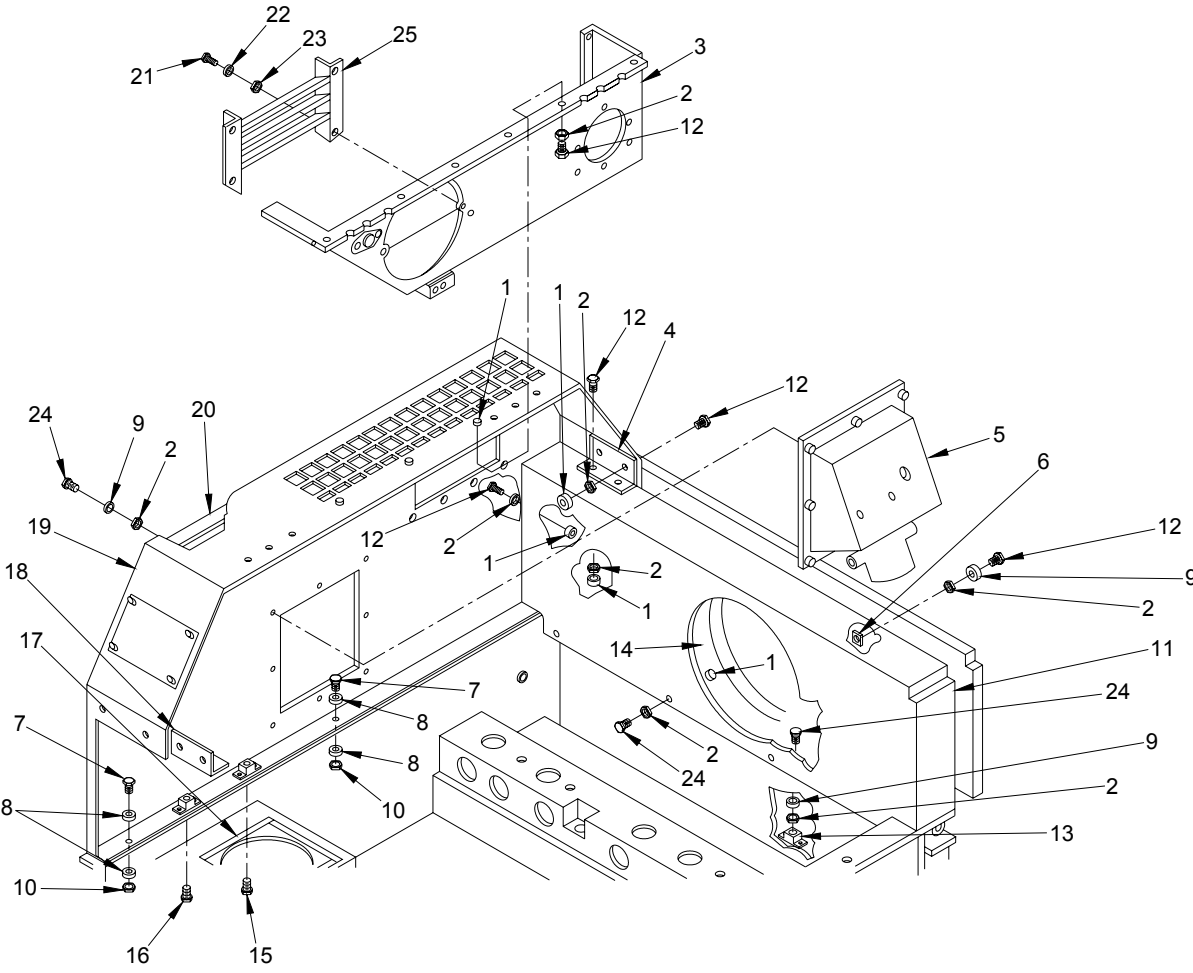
FRAME AND HOUSING ASSEMBLY/FRAME AND HOUSING PANELS
